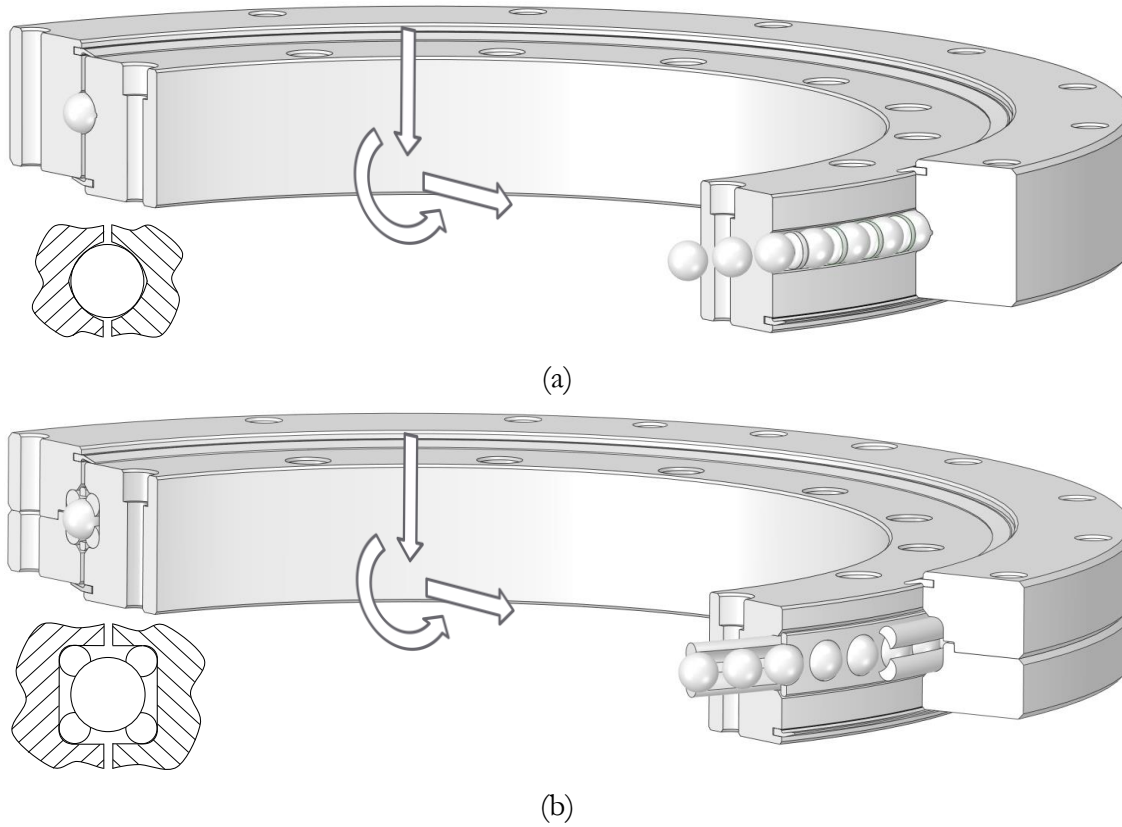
Four-point contact slewing bearing: (a) Conventional; (b) Wire-race.
